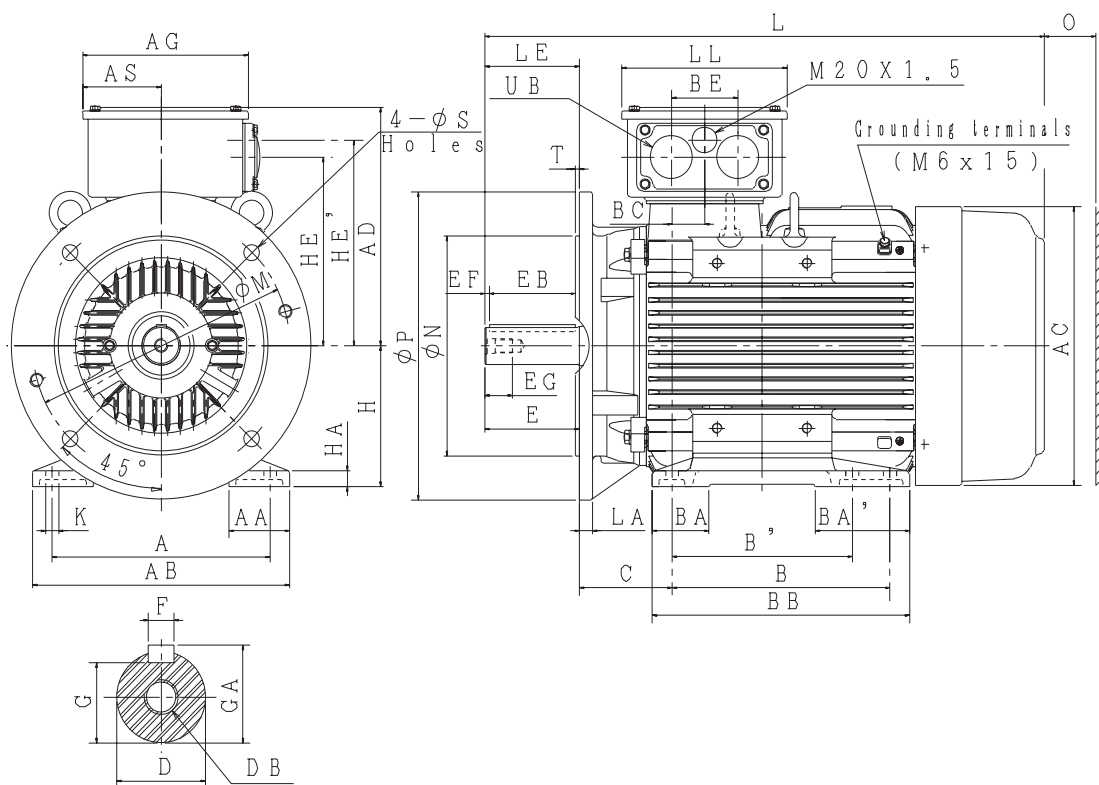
Outline drawing of cast iron design, feet version, mounting B35; frame size 160M - 180L
